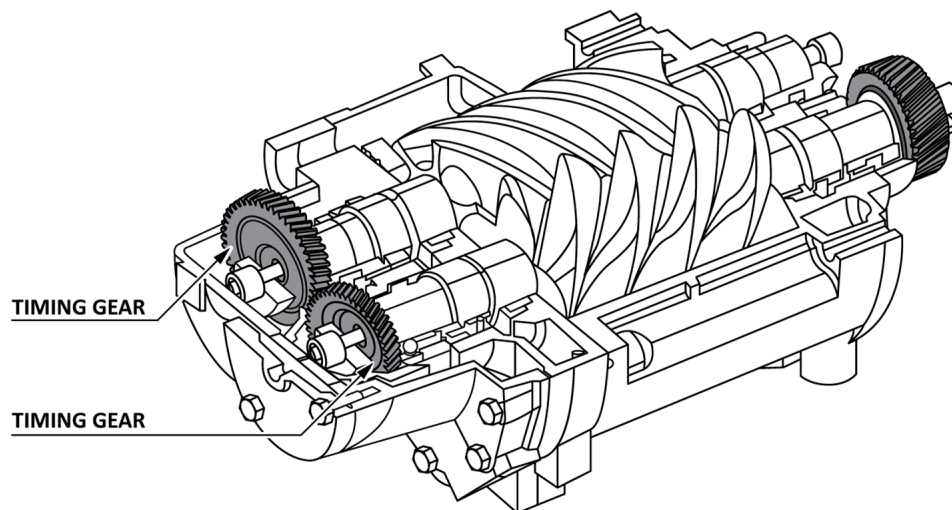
Oil-free screw compressor with synchronizing helical screws to maintain very small rotor clearances
